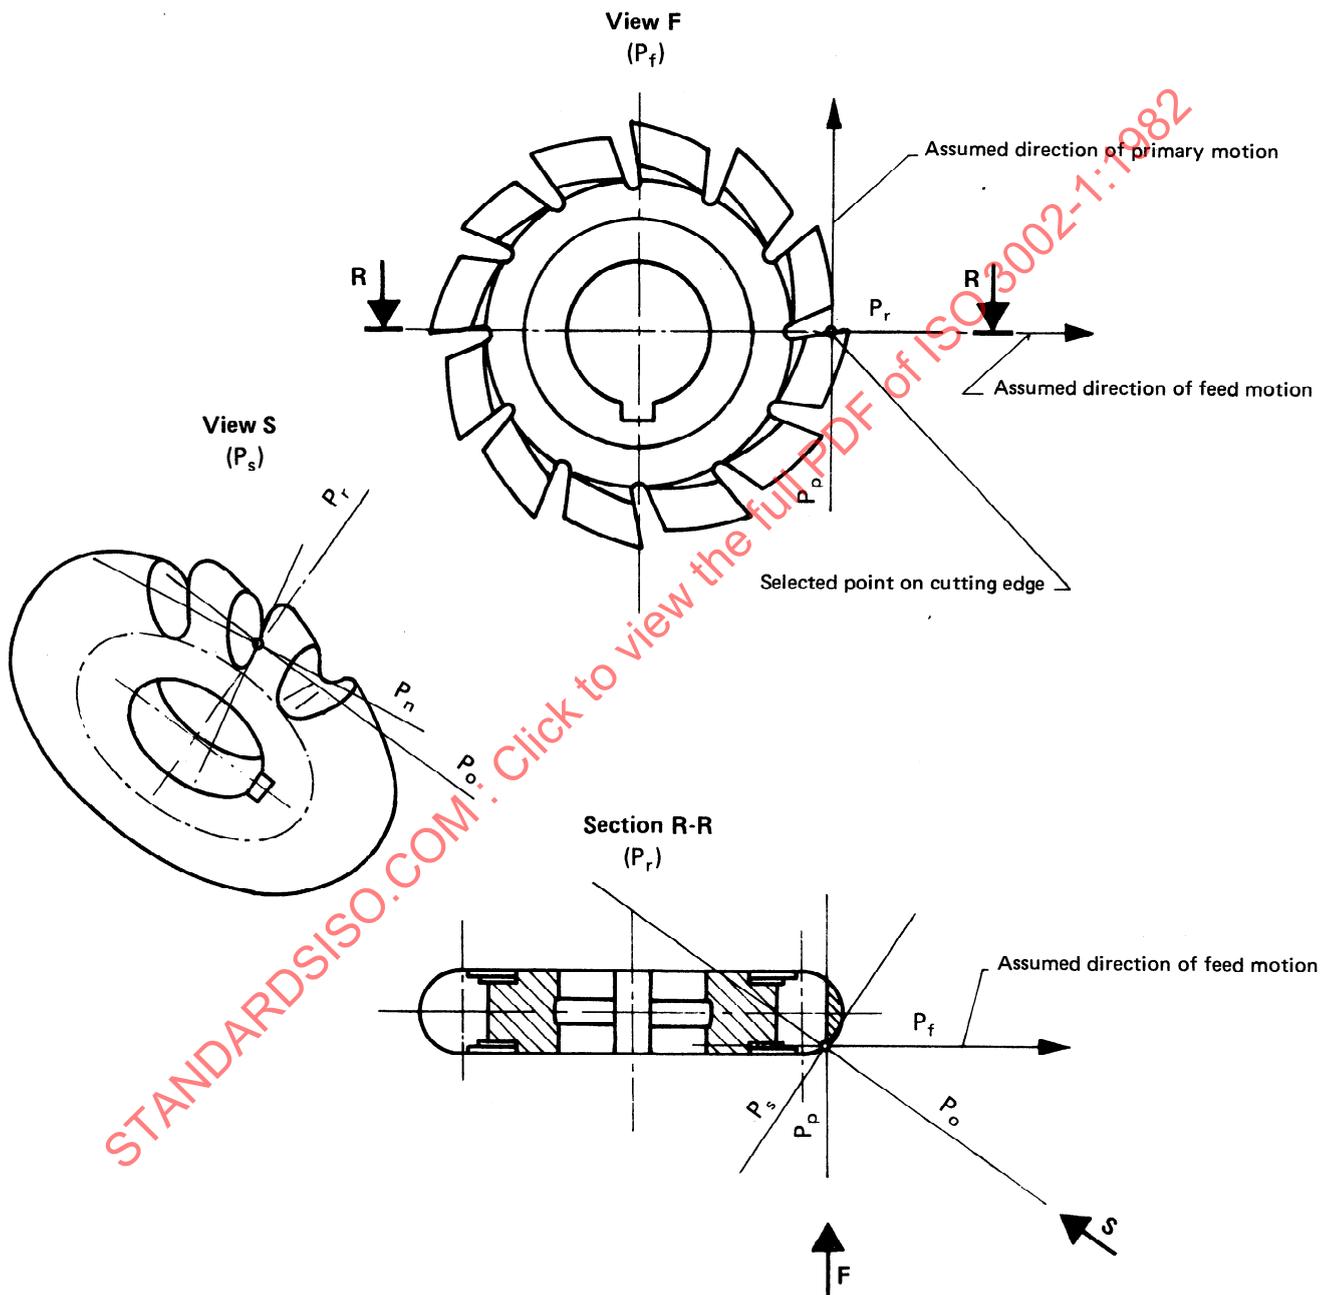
Planes in the tool-in-hand system – Convex milling cutter
